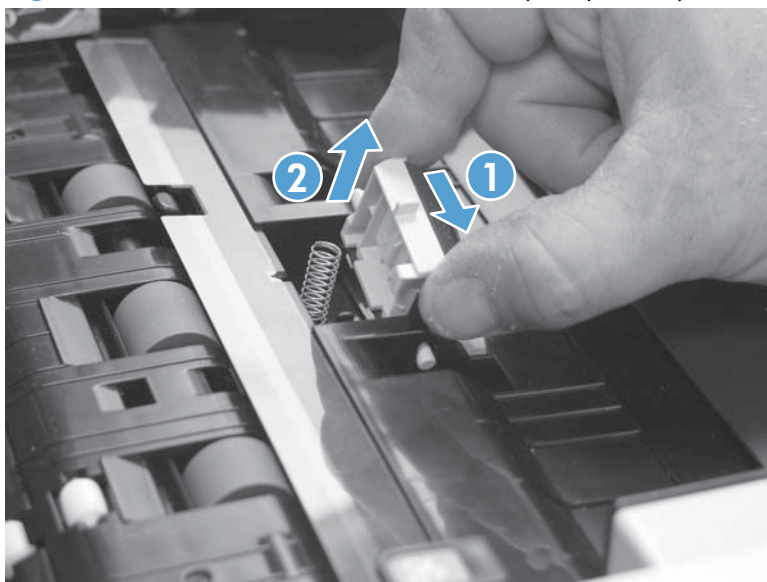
Remove the document feeder pickup roller pad and spring (1 of 2)
